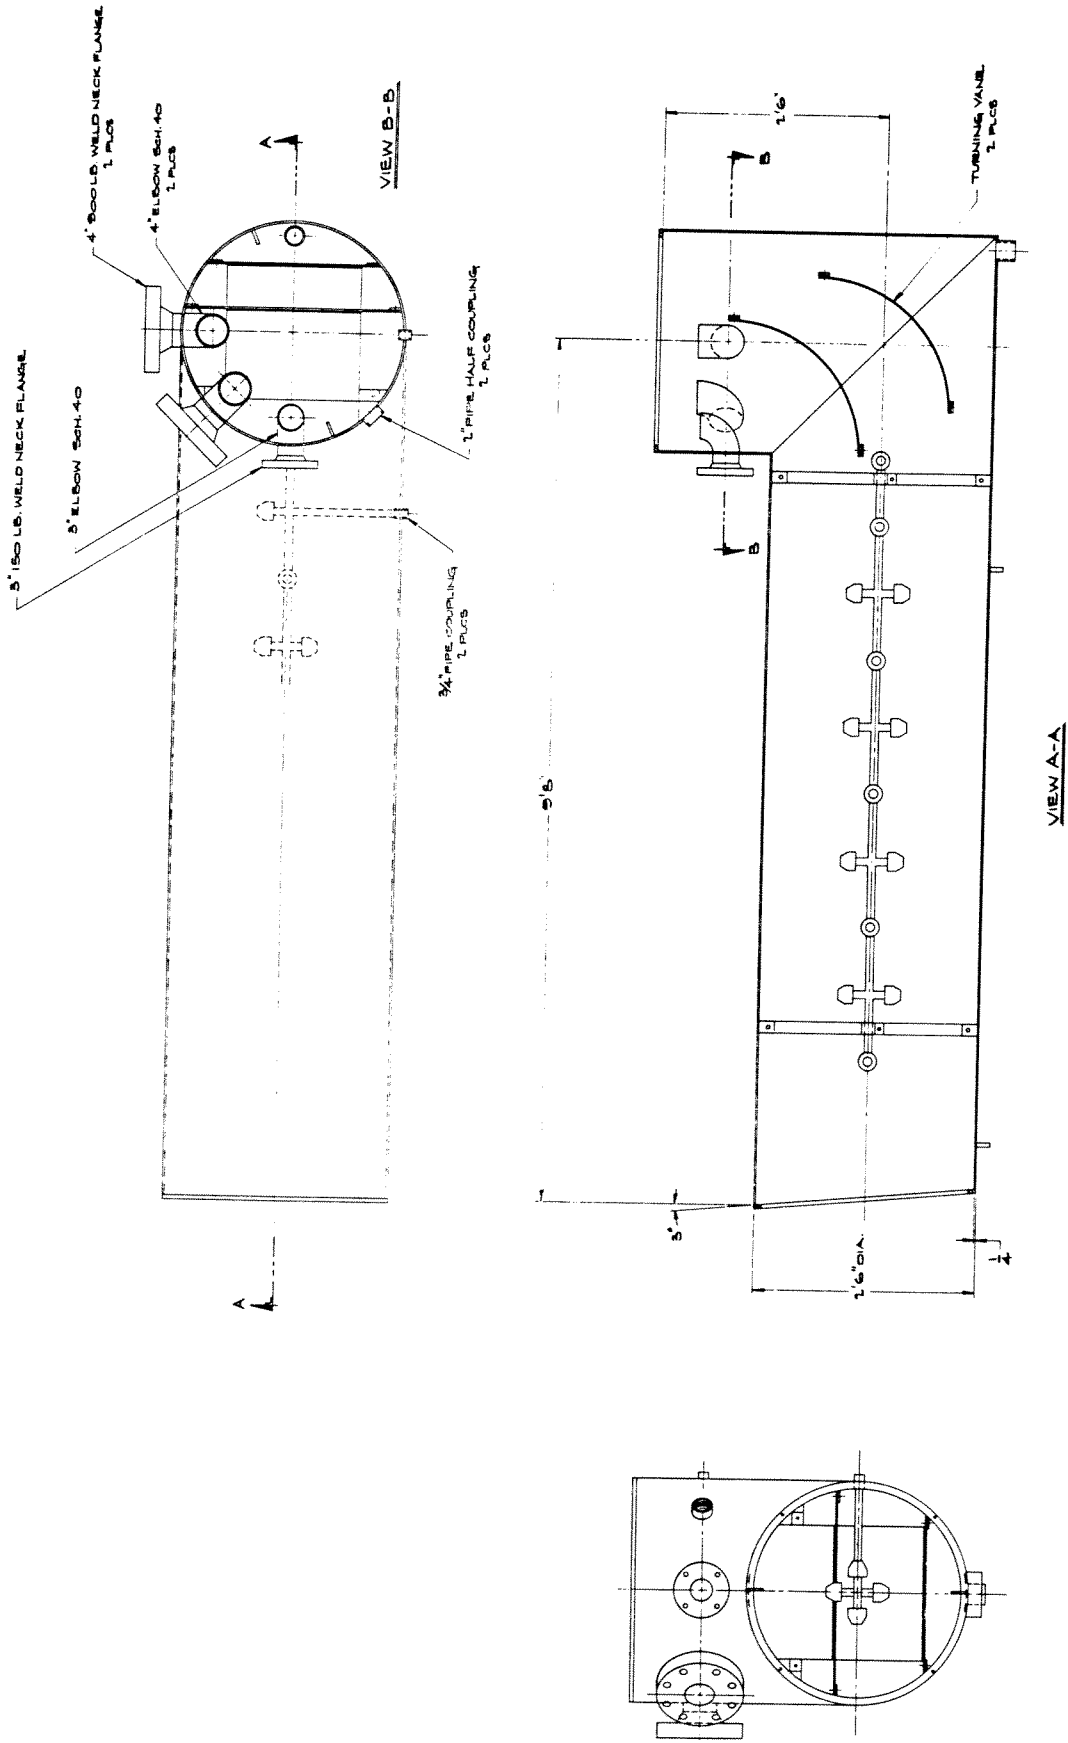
Cut-away Drawing Of The Shower Tunnel.
